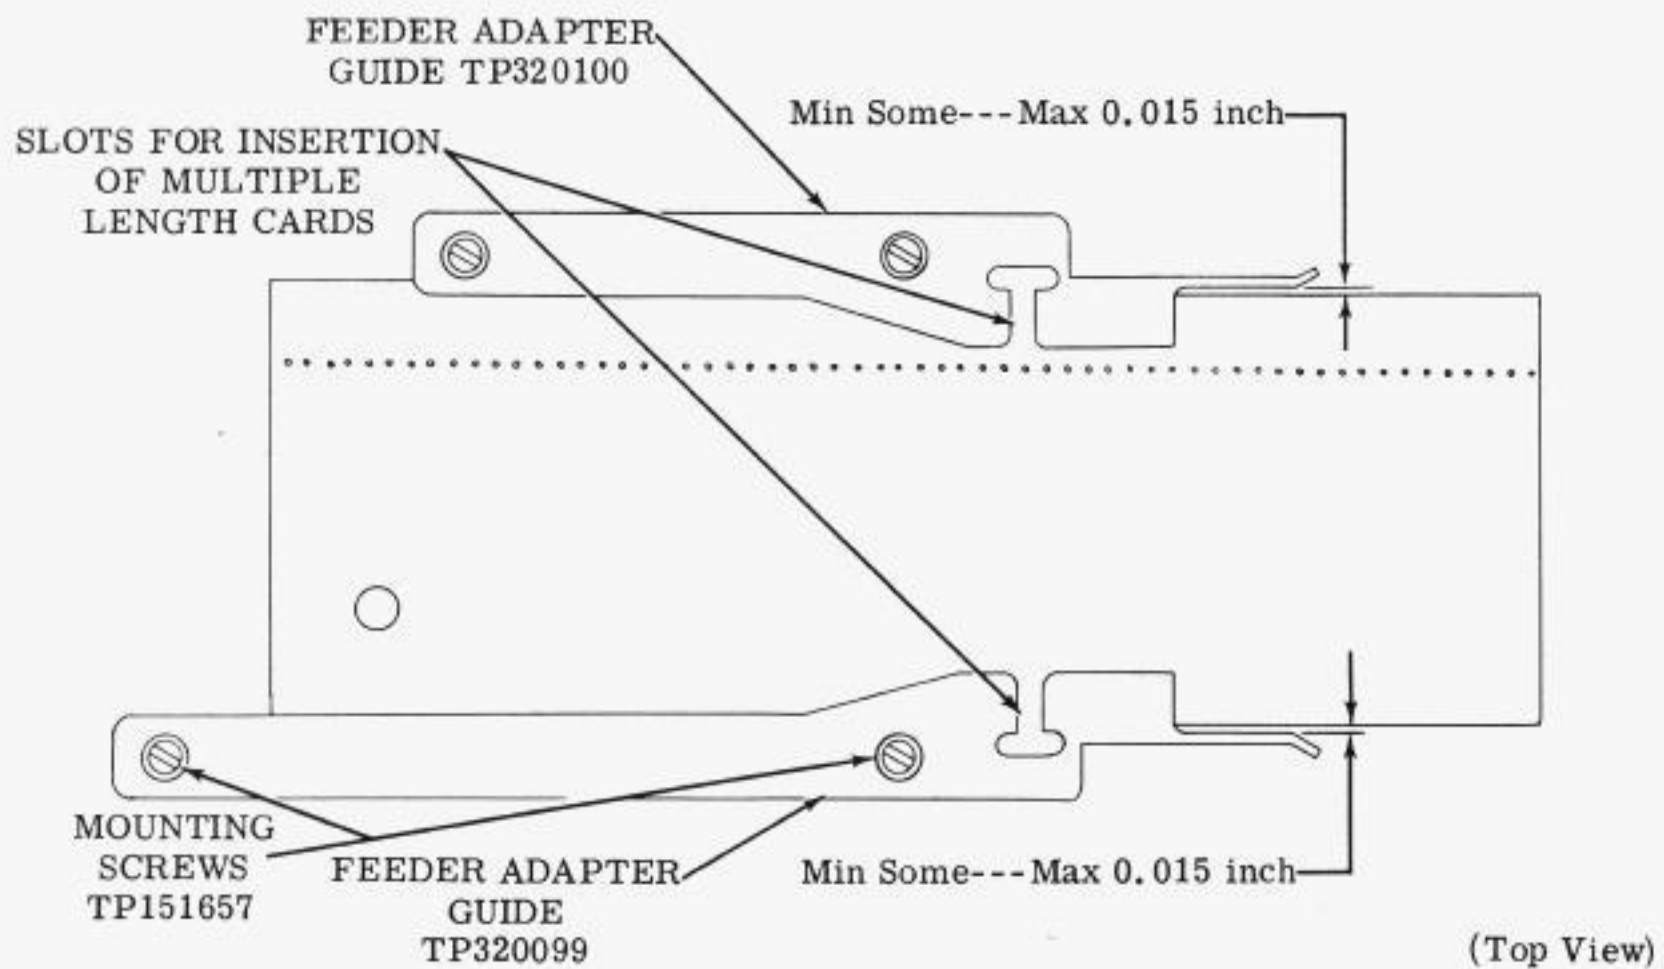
Feeder Adapter Guides Mounted on Reader Unit
